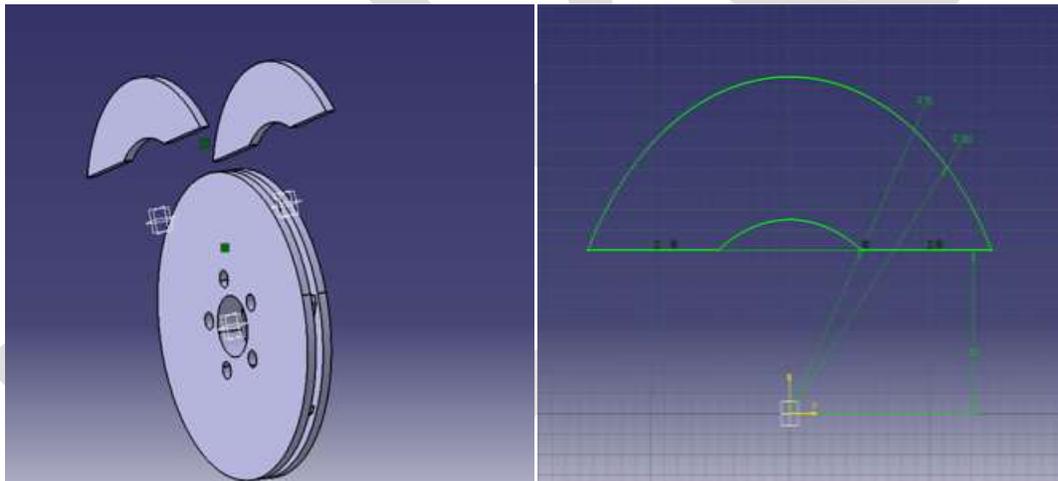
Exploded View Of Rotor Disc Assembly And 2-Dimensional View Of Friction Pad
